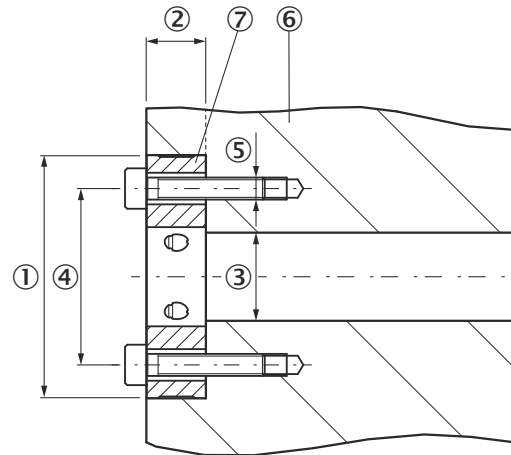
Preparation for ring magnet and C-magnet in piston rod with screw connection in non-magnetizable material
